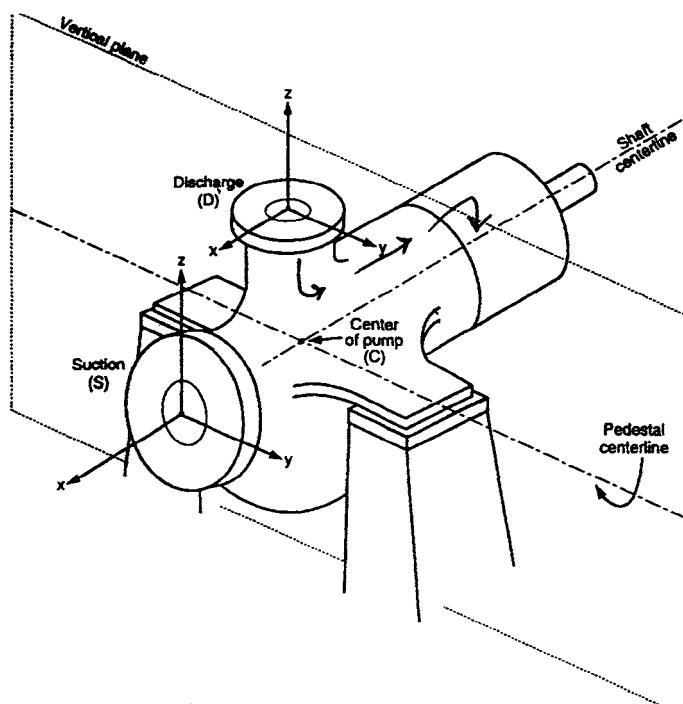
Force path from excessive discharge flange loadings to the bearing bracket (Courtesy of API)
